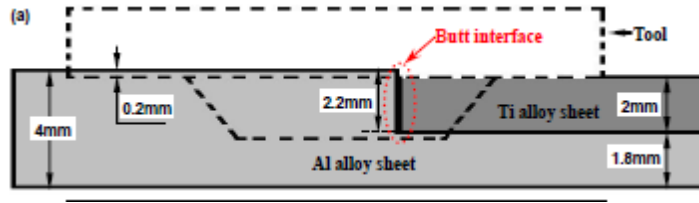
Schematic of modified butt joint design [Li, 2013].
